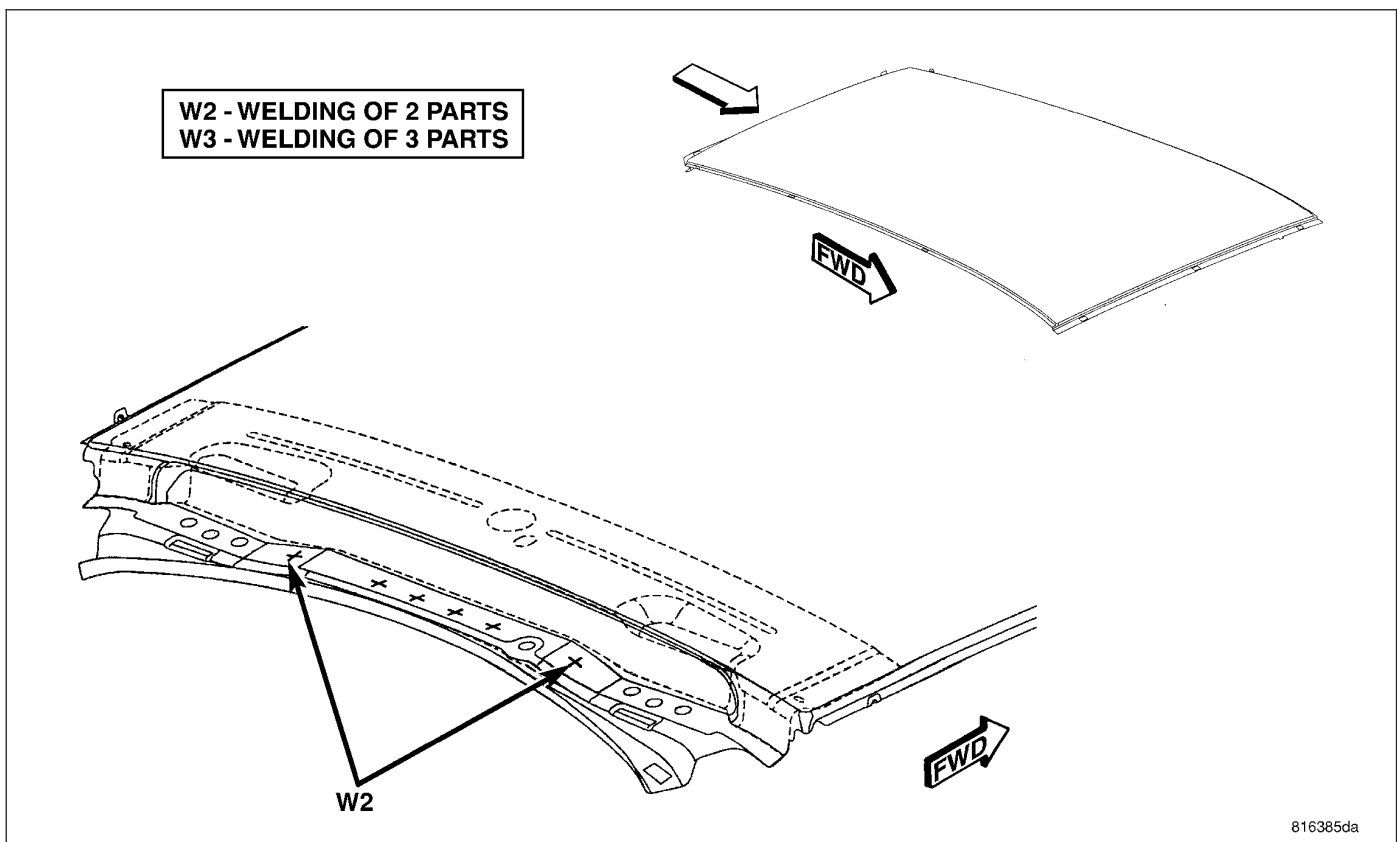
ROOF WITHOUT SUNROOF (2 OF 2)
